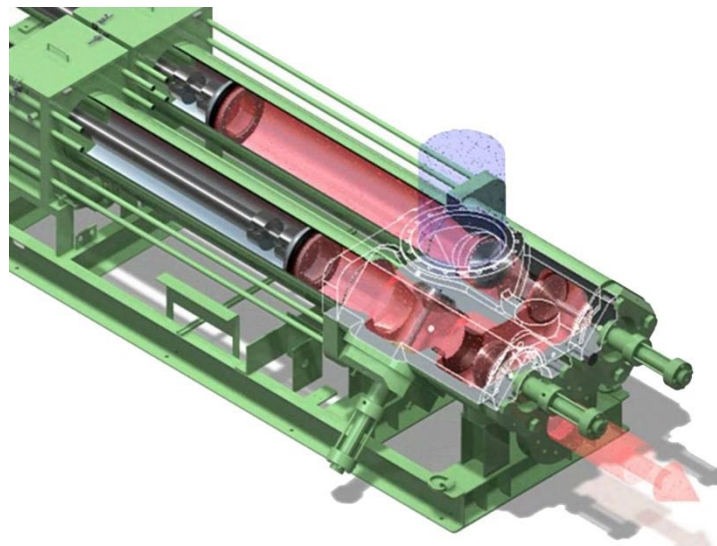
GEHO® two-cylinder hydraulically driven piston pump with actuated cone valves
